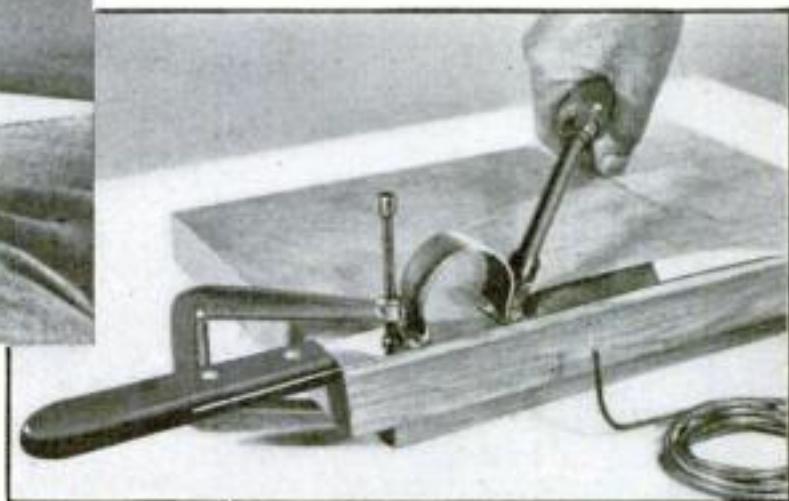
(at right). Soldering on the U-shaped arm clamp
